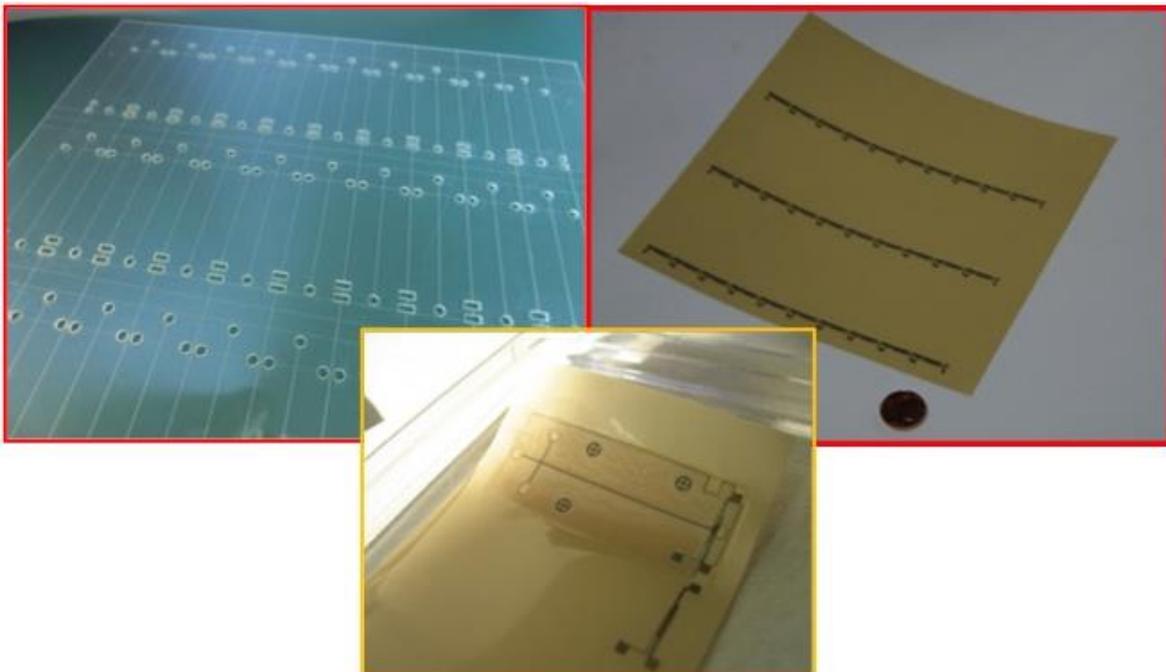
Demonstrator fabrication for microfluidic chip demonstrator (MicruX): laser machined microchannels (top left), printed electrodes (top right) and bonded demonstrator (bottom)
